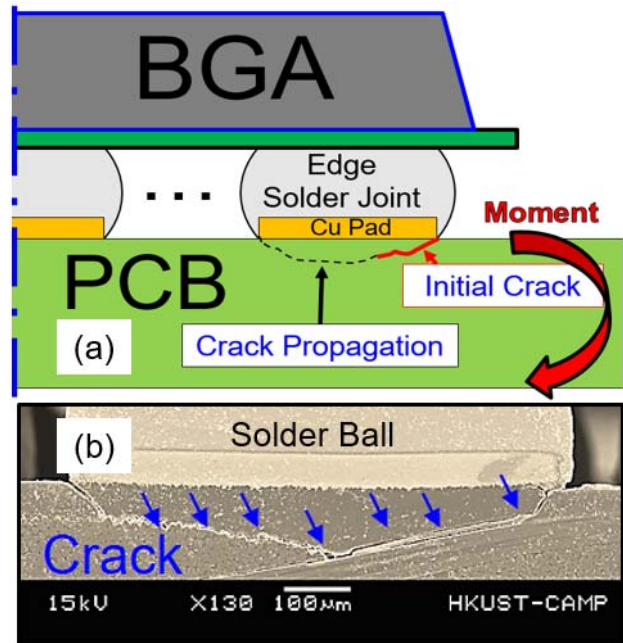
Pad cratering on a BGA-PCB assembly: (a) schematic demonstration; (b) SEM cross-section view.
